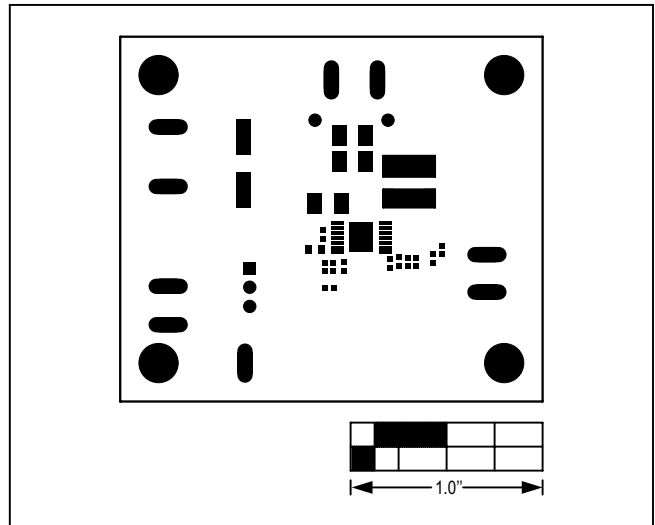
MAX17502HU EV Kit PCB Layout—Top Solder Mask
